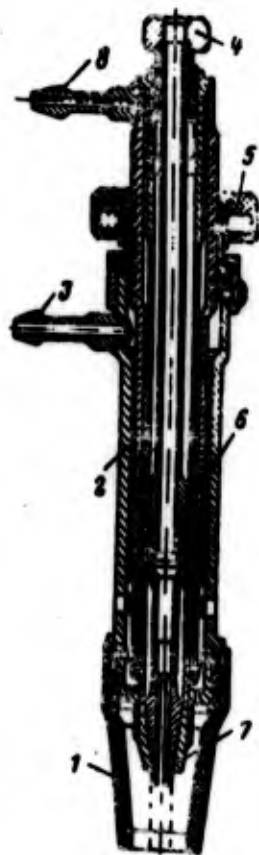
Head for automatic welding to nonconsumable electrode: 1 - tip; 2 - casing; 3 - pipe connection of protective gas feed; 4 - knob of electrode terminal; 5 - knob to change the position of the electrode; 6 - clip; 7 - tongs; 8 - pipe connection of the feed of cooling water.
